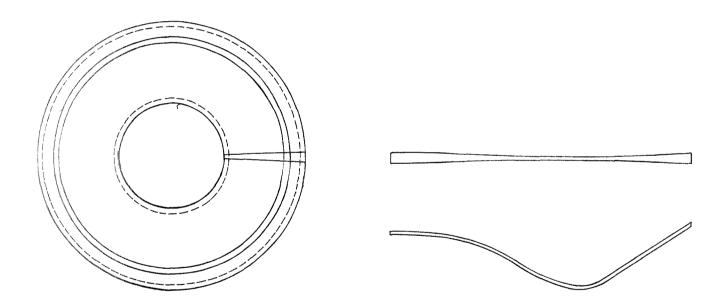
MILD-STEEL TOOLING ELEMENT FOR NOZZLE-SECTION WELDING SETUP
